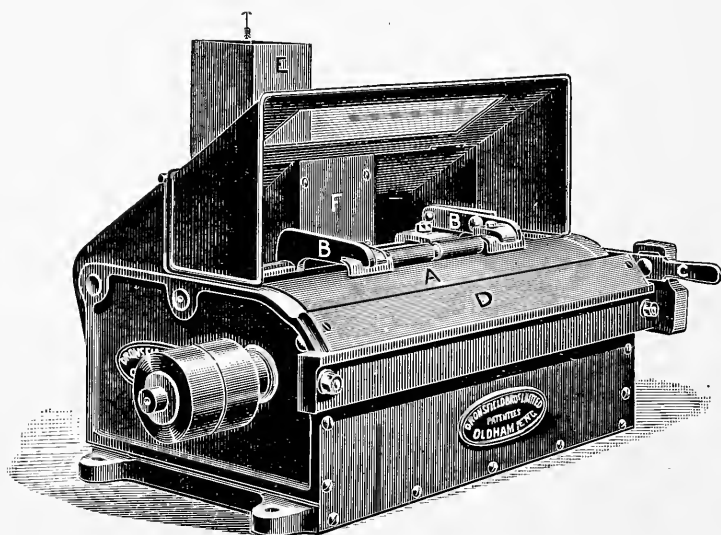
Patent Roller Ending Machine, with Fan, No. 45.
